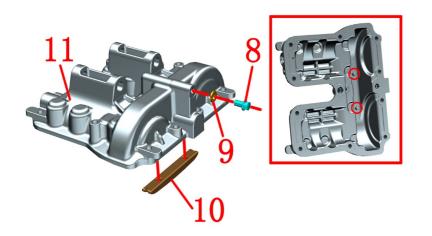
CYLINDER HEAD ASSEMBLY		Cylinder head cover assembly	CHK	40)
